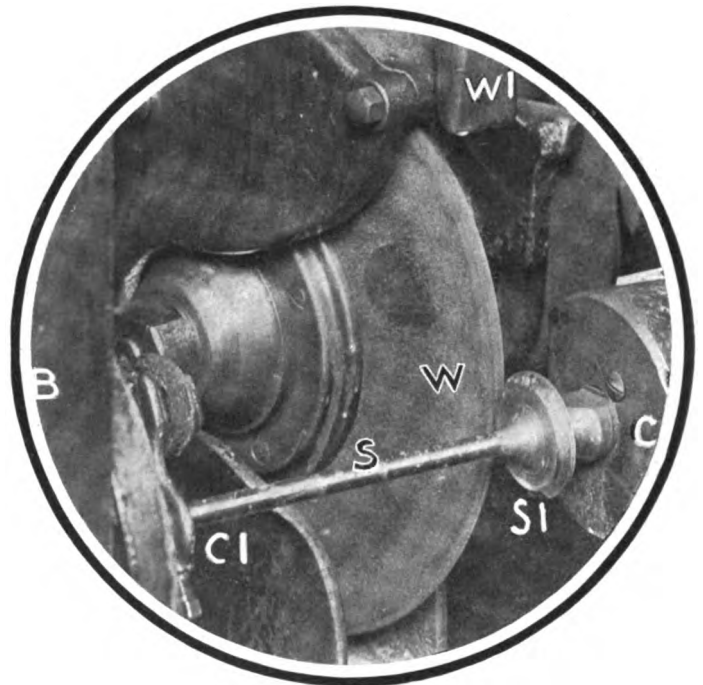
Grinding the seats of valves, thereby giving a true surface
